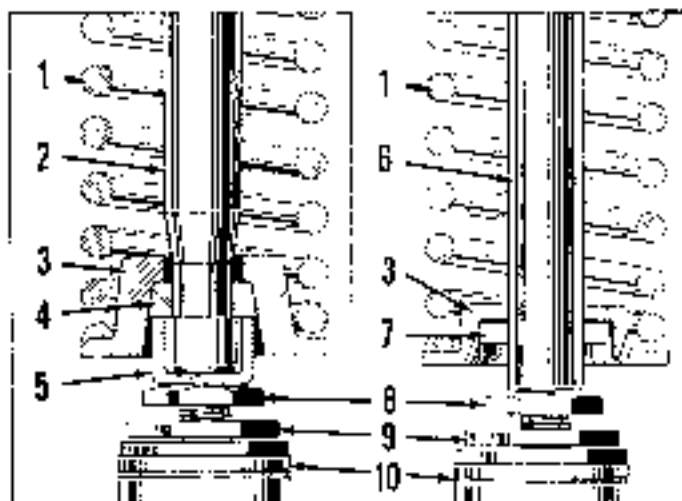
Continental M&2 exhaust and inlet valves. Valve rotators are used on exhaust valves only.
